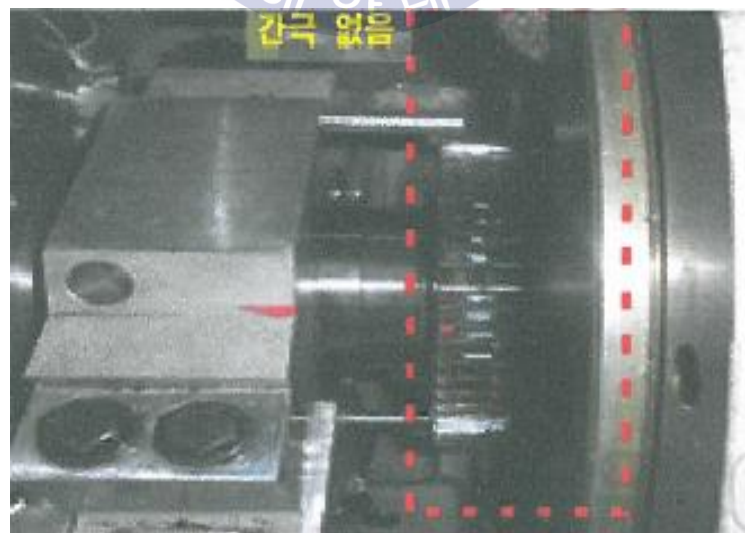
Damaged contact of power take off gear and reduction gear casing by extended crack
